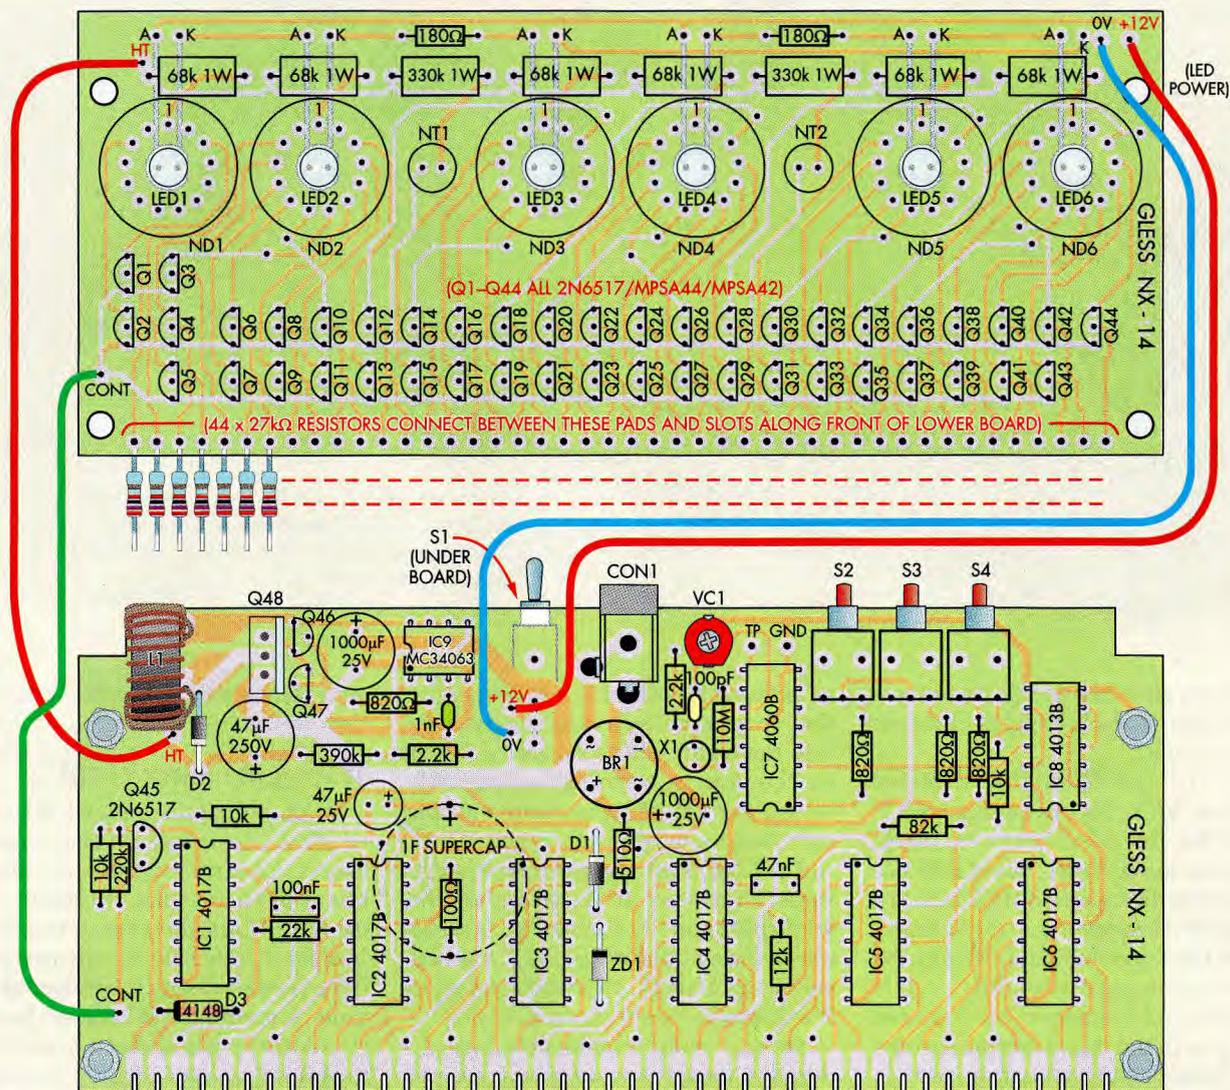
install the parts on the two PC boards and run the wiring connections as shown here to assemble your Nixie clock. Note that the six blue LEDs for the optional up-lighting (ie, LEDs 1-6) are installed on the rear of the top board – see photo. Switch S1 and the 1F supercap are installed on the rear of the bottom board.
